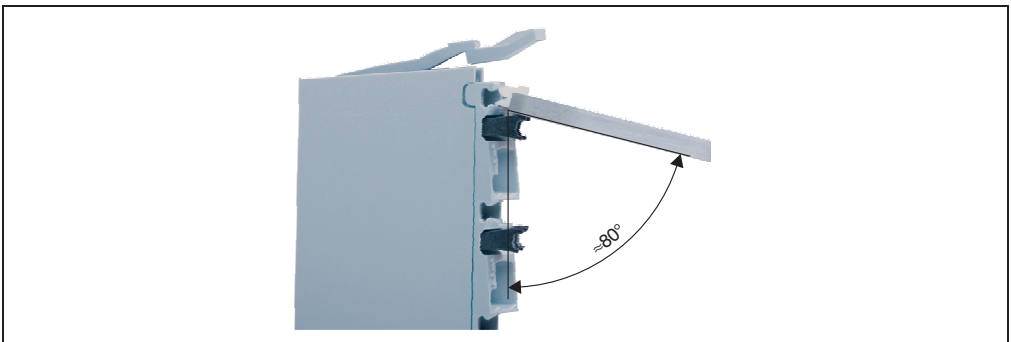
Hold the labeling tool at approximately 80° angle to the terminal block
